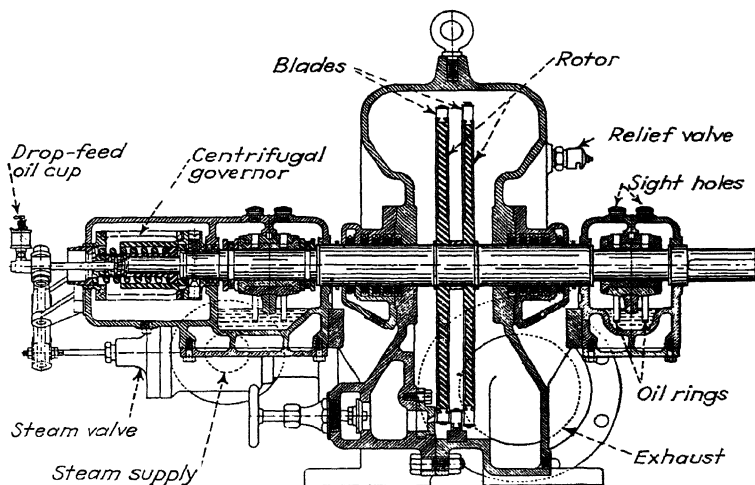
Mechanical-drive turbine with ring-oiled bearings.
